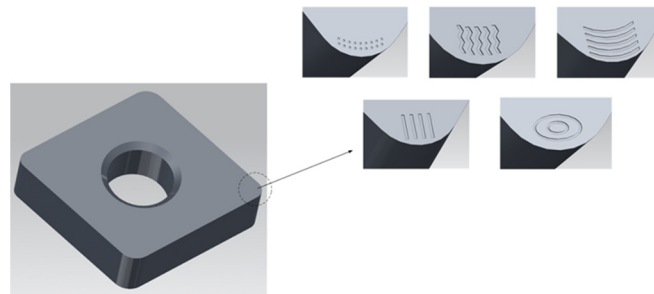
Geometric model and enlarged drawing of micro-textured tool.
